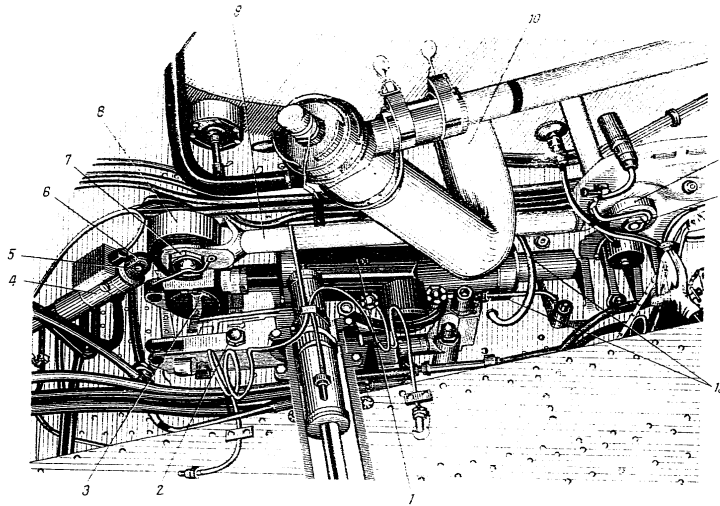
INSTALLATION OF FOOT CONTROL HYDRAULIC BOOSTER
